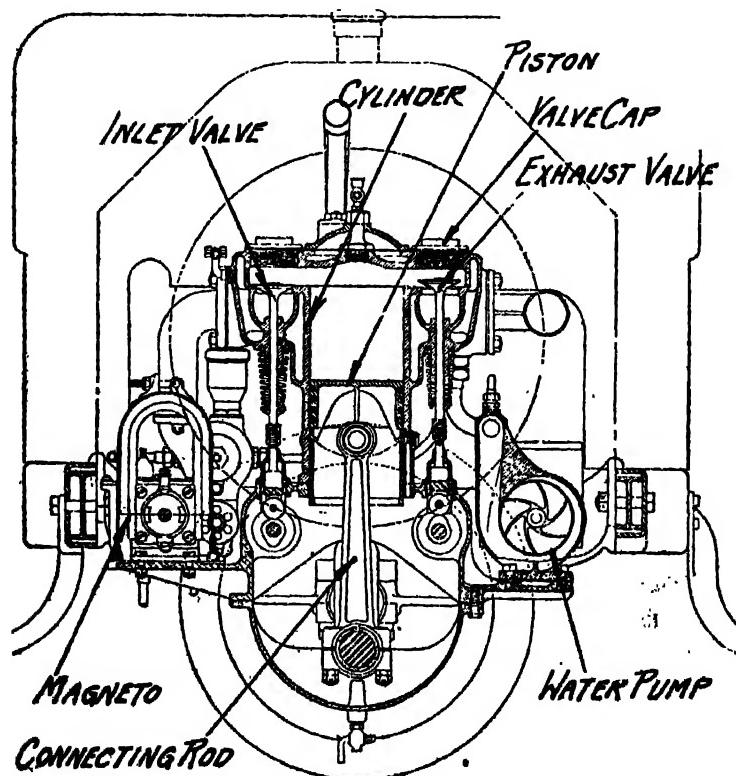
Front Sectional View of Locomobile Four Cylinder Motor.
